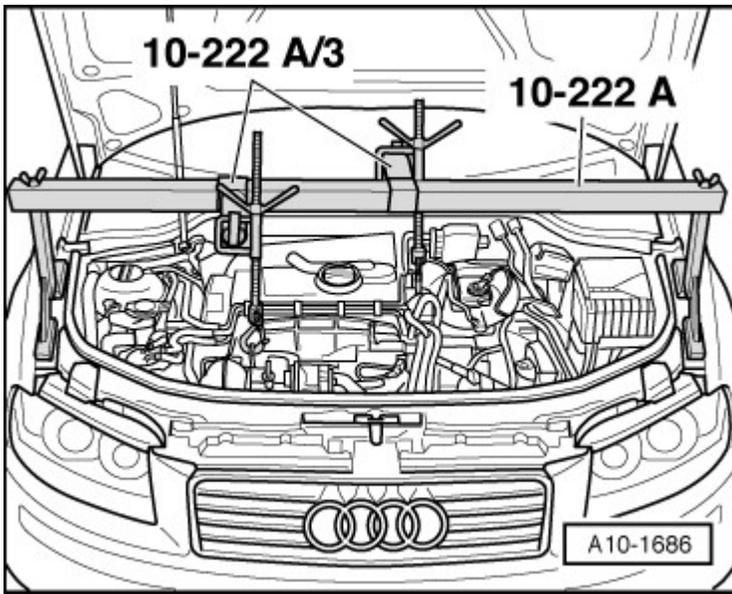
Identifying Engine Support Bridge 10-222 A With Adapters 10-222 A /3
